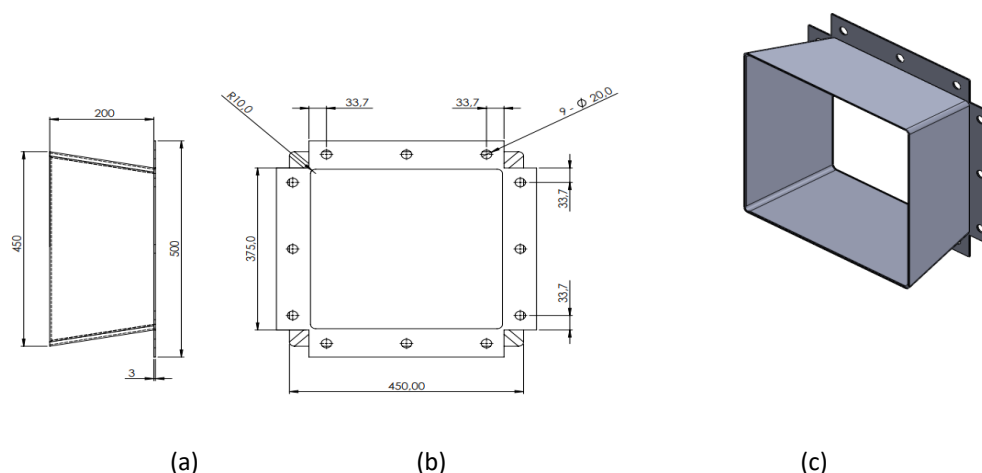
Schematic design of the air ejector, (a) side view, (b) front view, (c) 3D design
